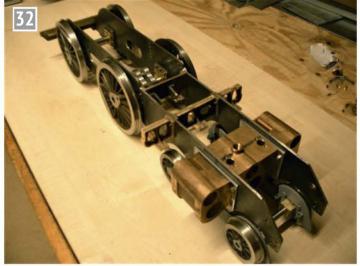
shows the School starting to take shape. The steam chests were next on the list and these were turned to fit the cylinder castings and the bore for the spool valves drilled and reamed in the lathe using the DRO to set the position of the ports (photo 33). The steam chests
